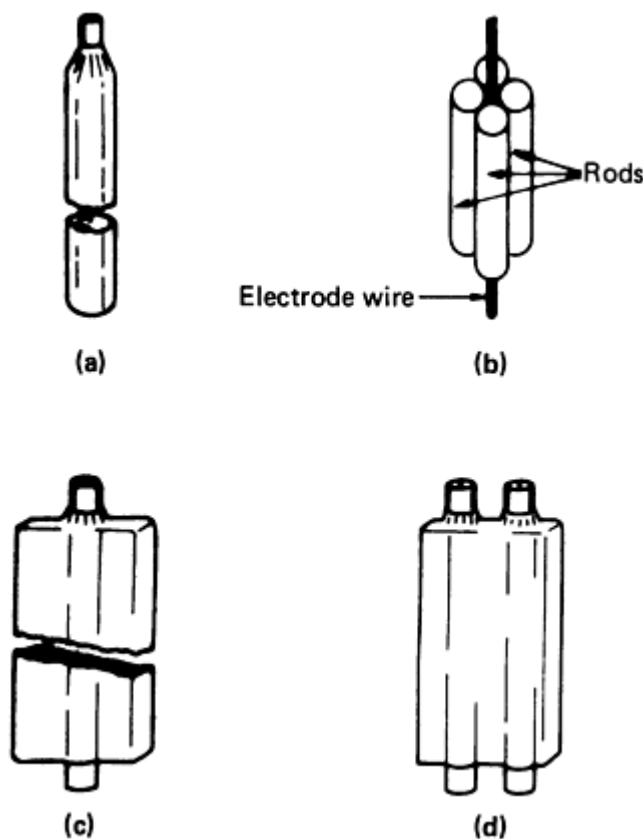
SELECTED ELECTRODES AND GUIDES (NOZZLES) USED IN ELECTROSLAG WELDING. (A) SINGLE FLUX-COVERED TUBE. (B) CLUSTER OF RODS TAPED TOGETHER. (C) FLUX-COVERED WING NOZZLE. (D) FLUX-COVERED WING OR WEB NOZZLE WITH TWO TUBES
